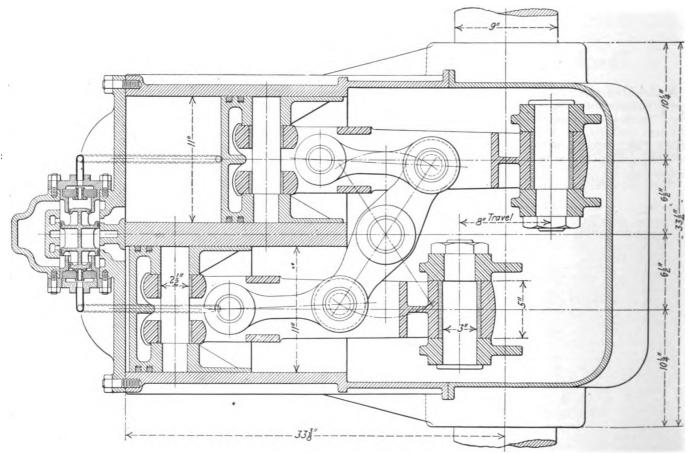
Drawing Showing the Arrangement of the Cylinders and Piston Rods
